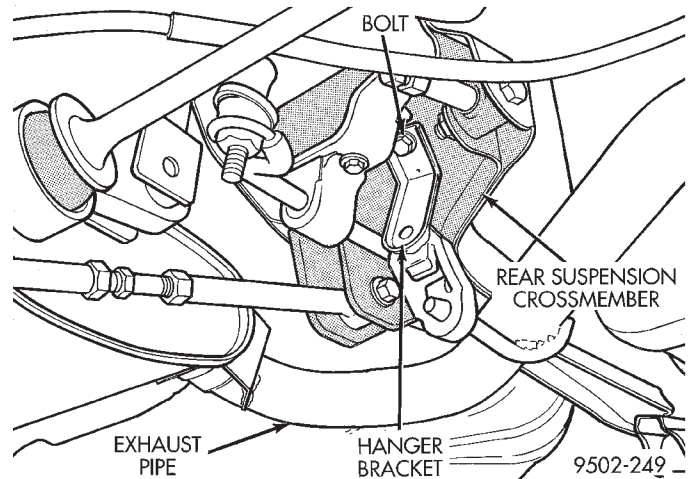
Exhaust Pipe Hanger At Rear Suspension Crossmember
